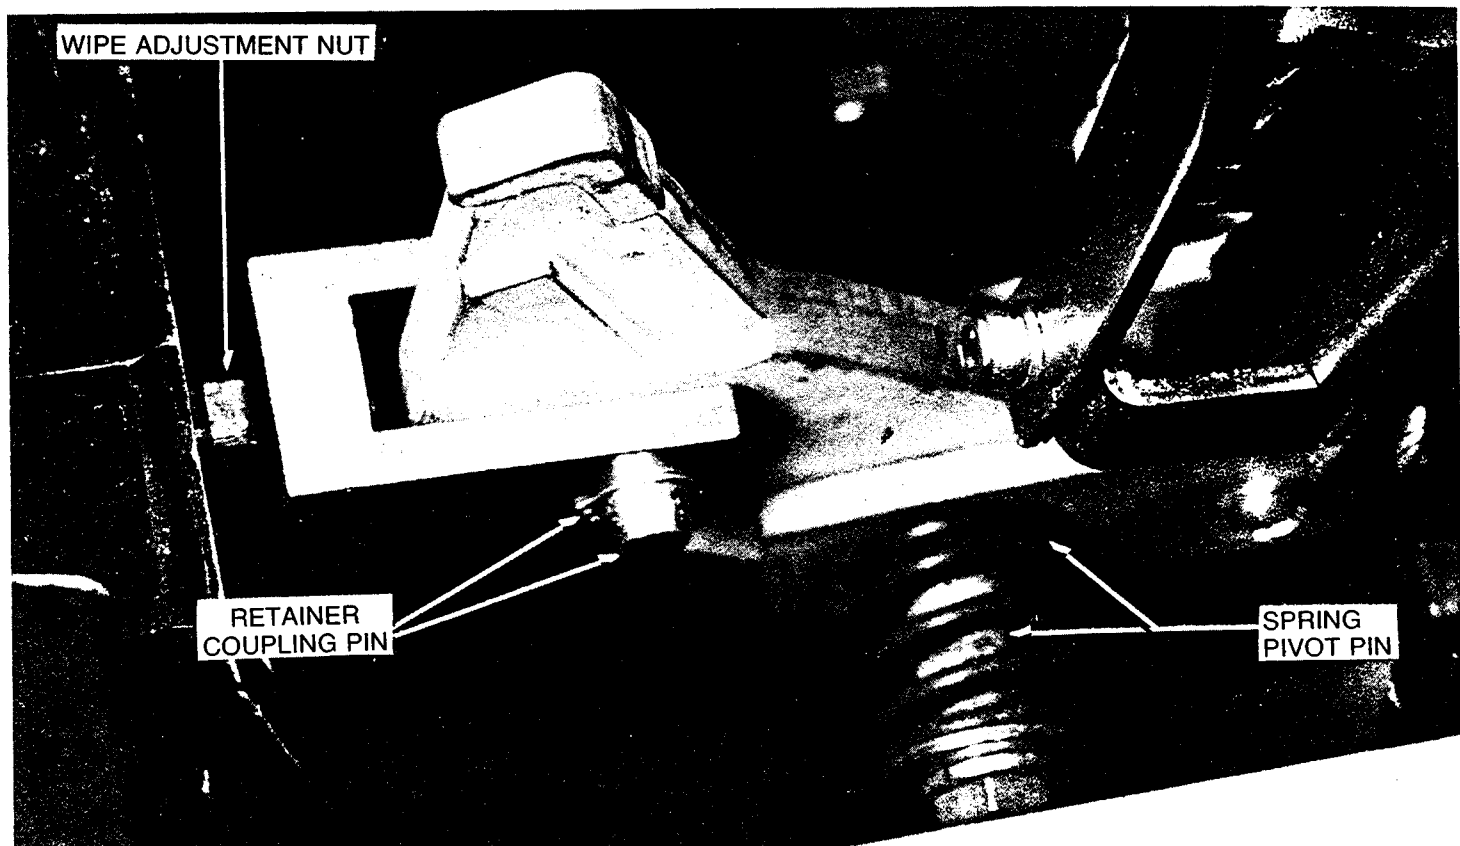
WIPE ADJUSTMENT NUT—800 AMP CONTACT STRUCTURE
